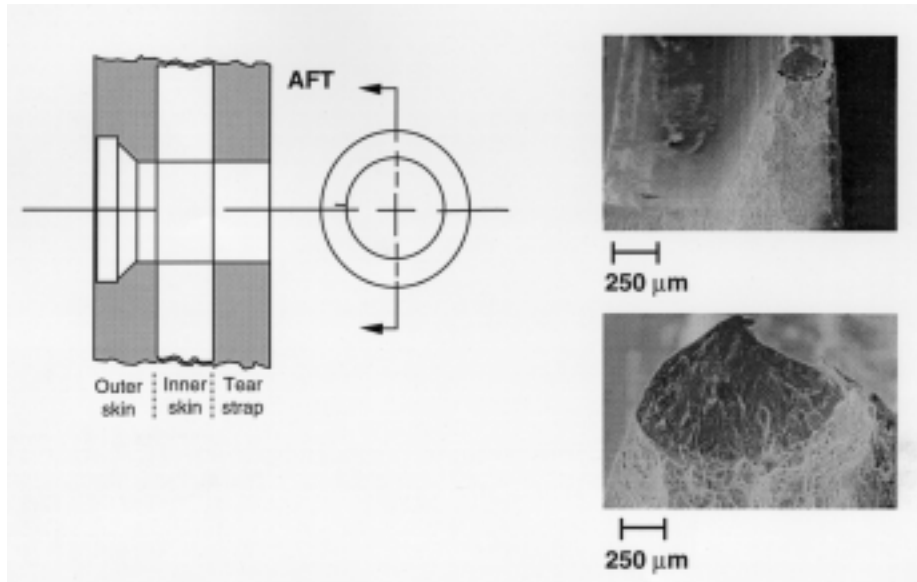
(a). Small Fatigue Cracks at Rivets.
